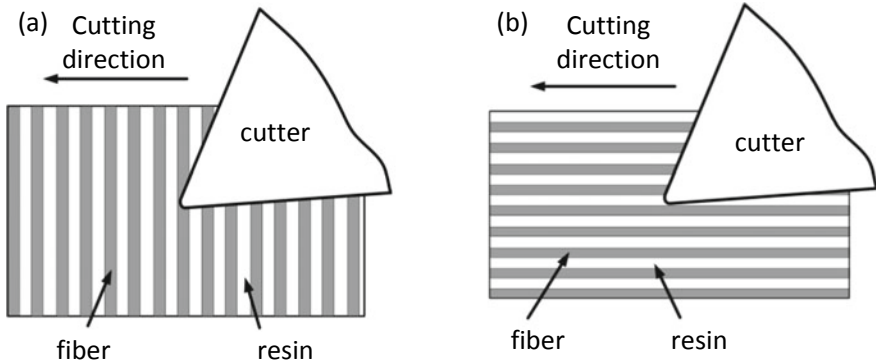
Two cutting models during machining of unidirectional composites a orthogonal machining, b cutting in a layer
